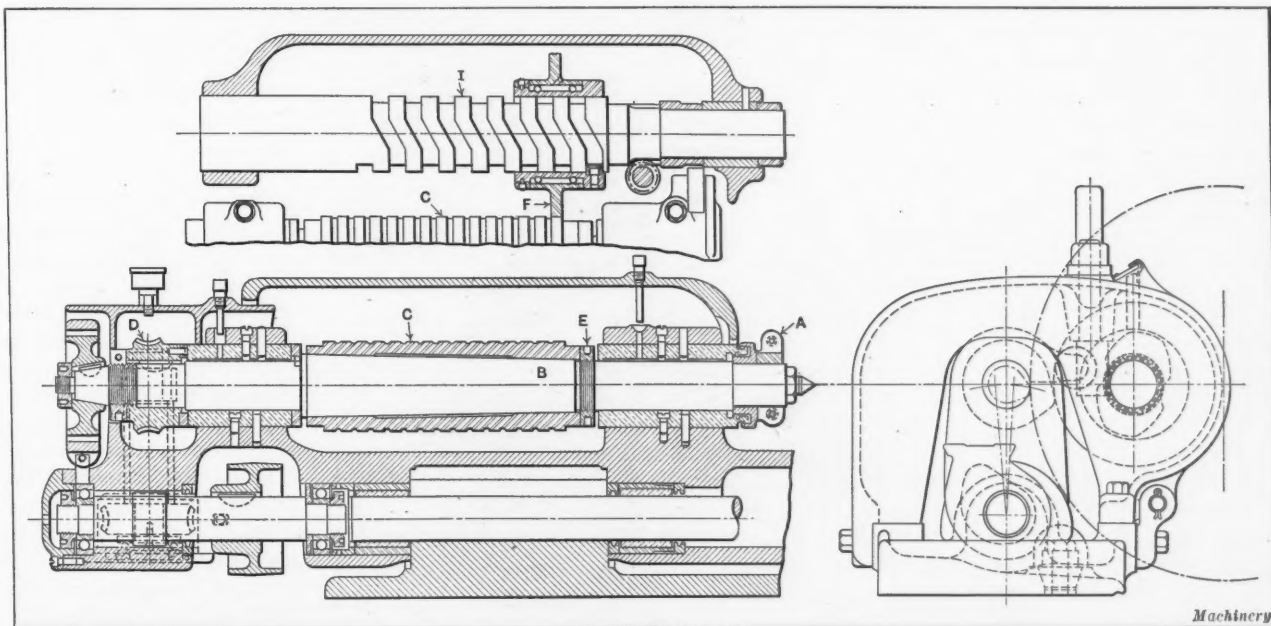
Headstock End of Grinding Attachment developed for machining Automobile Camshafts
